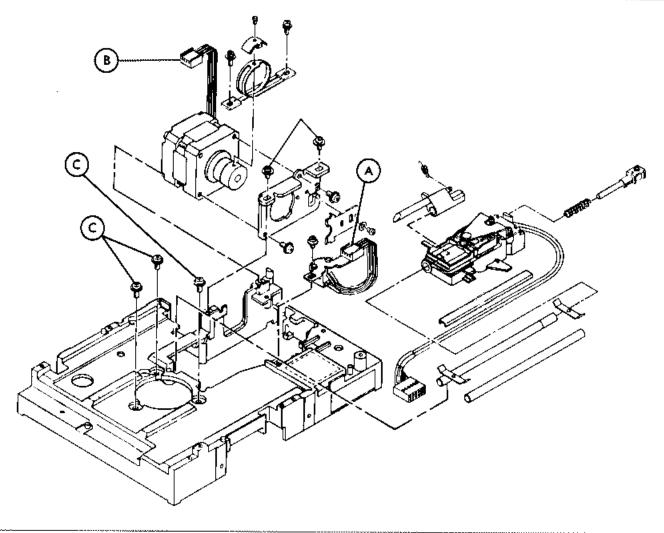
MOTOR CONTROL BOARD REMOVAL/REPLACEMENT
